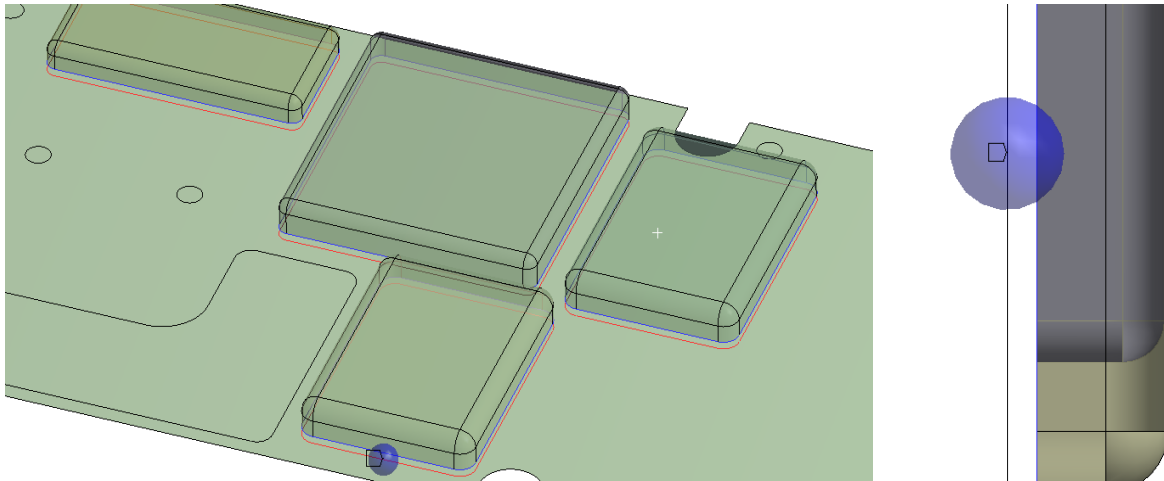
Mesh to mesh contact condition between RF board (red) and shielding cans (red), blue sphere indicating contact tolerance (necessary for surface to surface body contacts)
